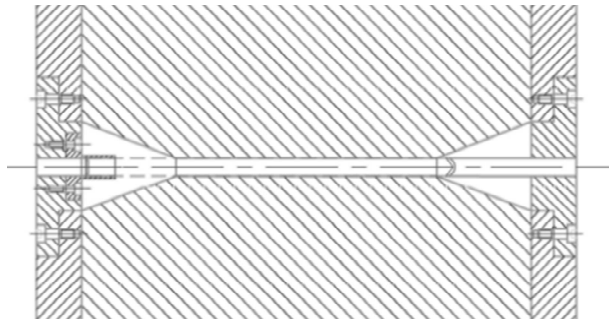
Schematic diagram of the twist drill spiral groove abrasive flow polishing fixture
